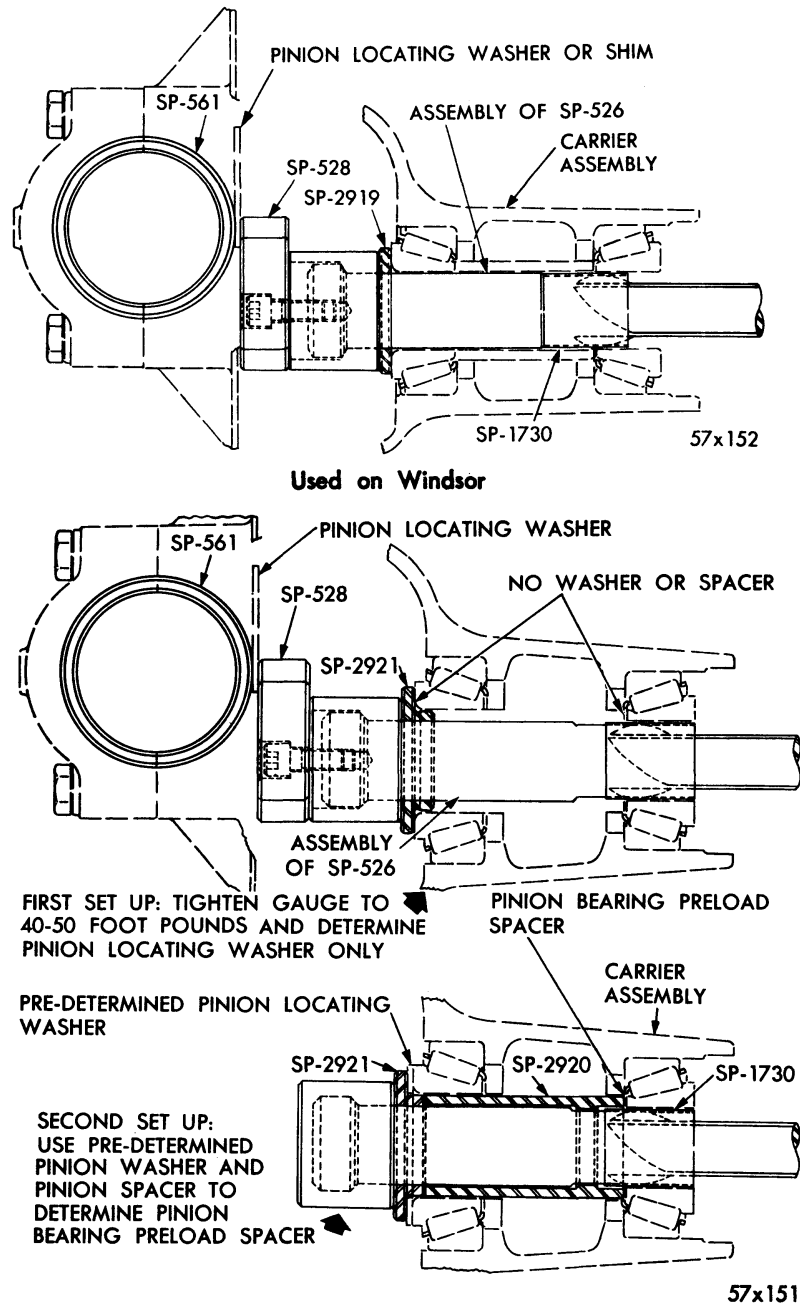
Used on New Yorker—Imperial Tool C-758-D-3 Installed in Housing
